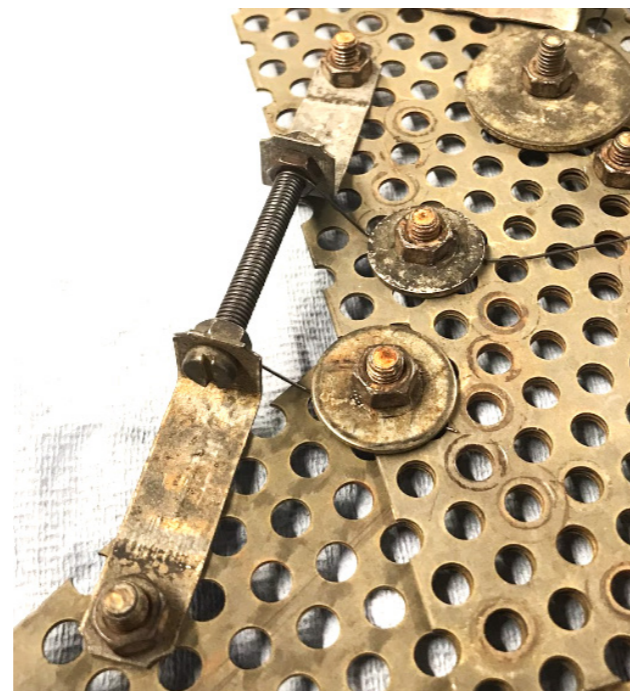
REVISED BOLT JIG FOR LONGER SPRING LENGTH AND CONTROLLED SPRING END WIRE DIRECTIONS
